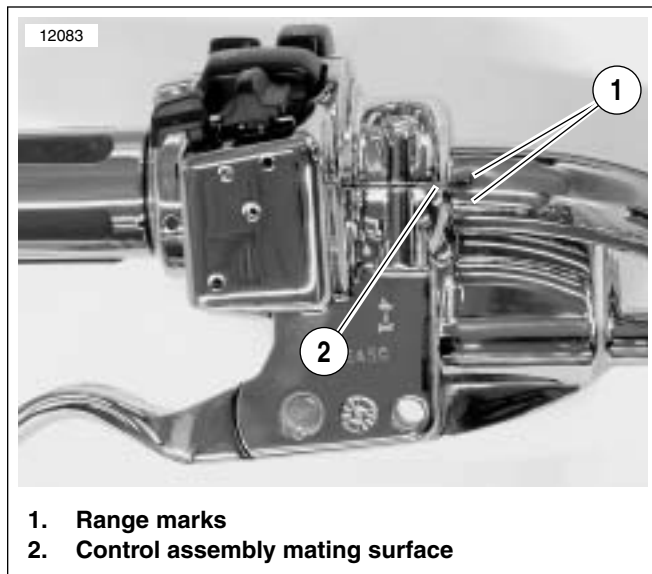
Range Marks (Handlebar Control Assembly Bottom View, Left Side Shown)
